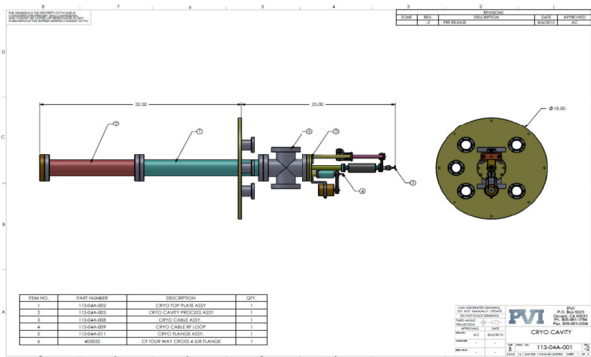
Cavity assembly on flange to be mounted on a BNL cryostat.
